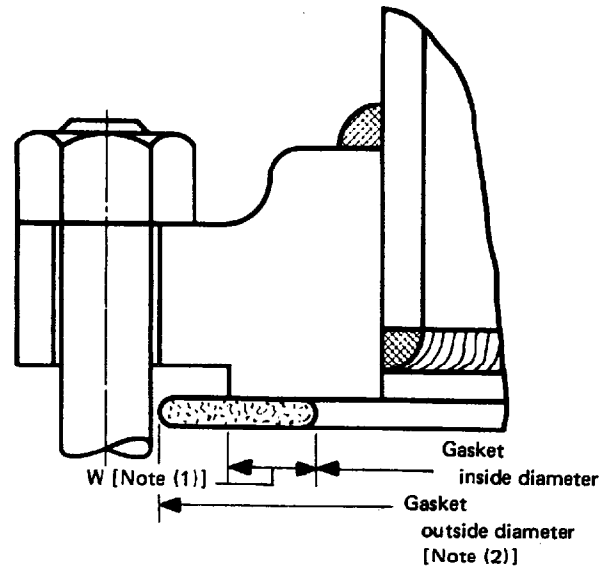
³ LARGE TONGUE WIDTH GASKET WITH EDGES EXTENDING TO THE BOLT
